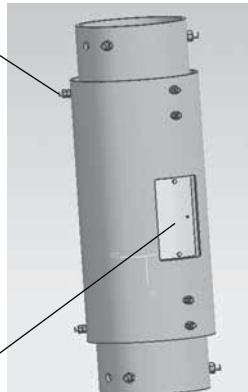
Aligned position of shielding mechanism inspection window and main insulating cylinder inspection window
